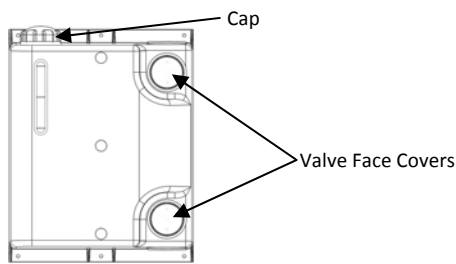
Geo-Prime tank Cap and Valve Face Covers
